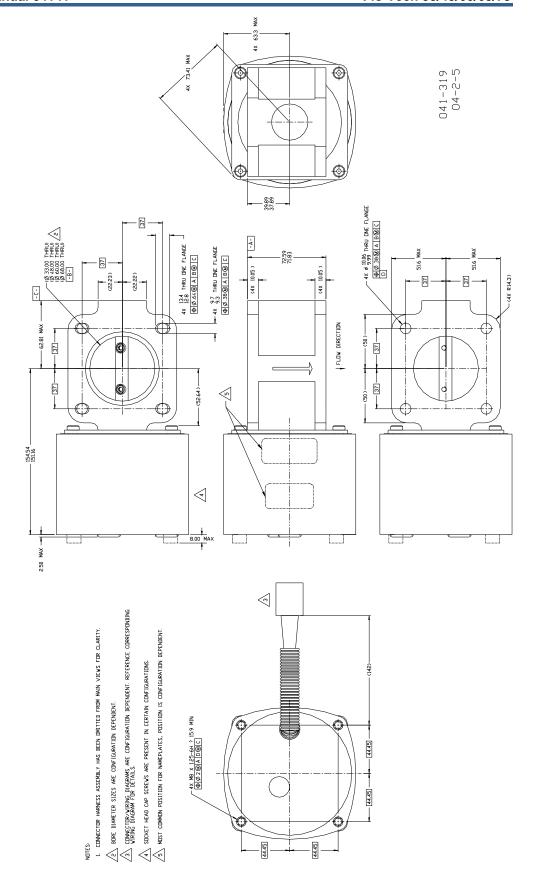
Flo-Tech Outline Drawing (Top Slotted Flange Mounting)
